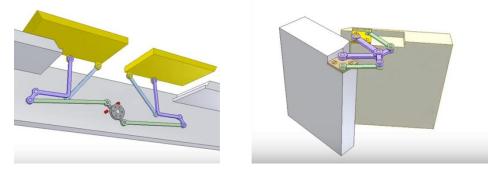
(a) Double-door ceiling window design¹, (b) 90 degree concealed hinge design for single door²
